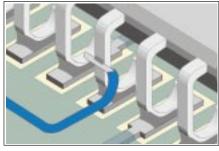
Not Recommended* Wire soldered perpendicular to lead.
